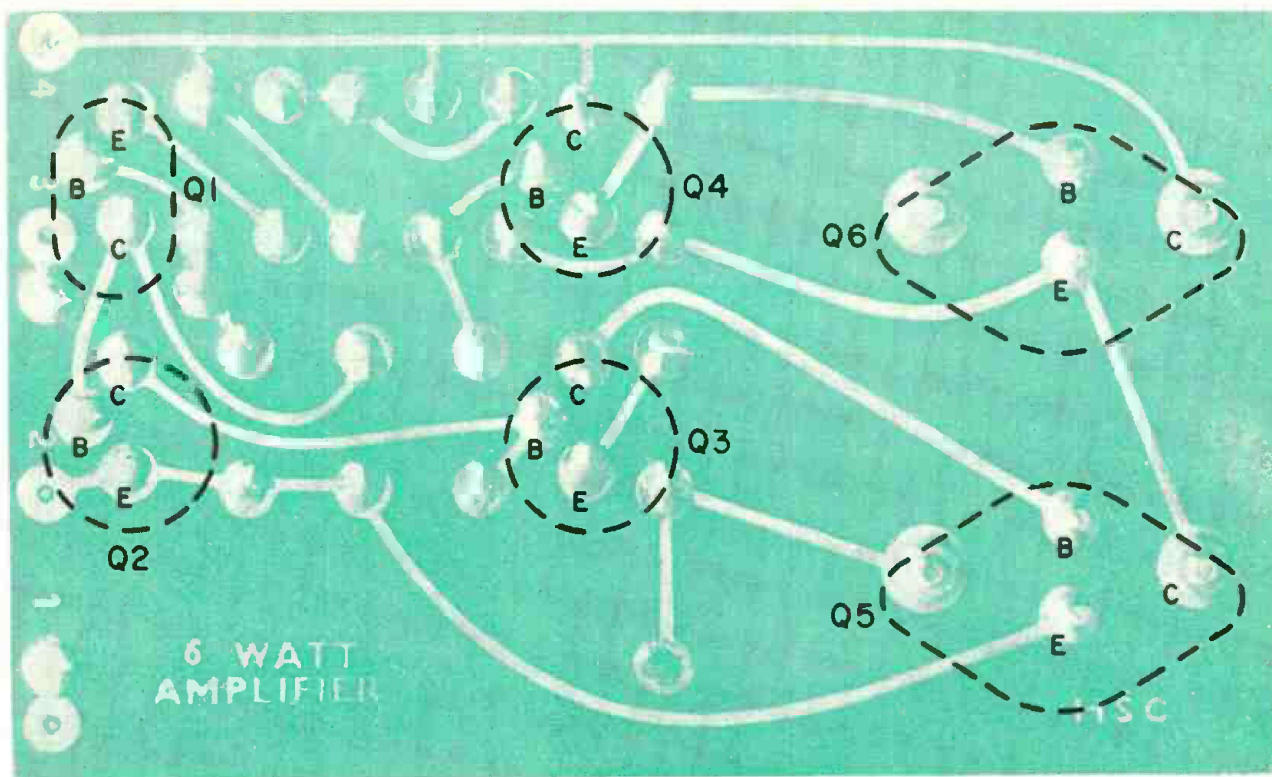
Use this full-size guide in making your printed circuit board. Space the transistors about  $\frac{1}{2}$ " above the board and hold transistor leads on top side of board with a pair of long-nose pliers when soldering.
